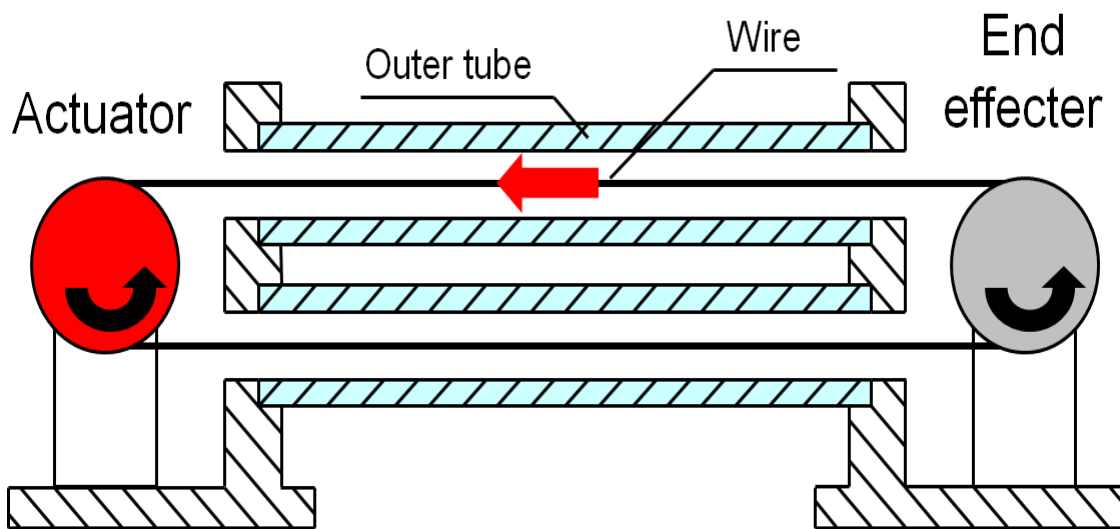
Wire and outer-tube driving mechanism: the wire is fixed at the actuator and the output object. The length of the tube is constant. As the tube is flexible, the actuator can be placed without many constraints.
